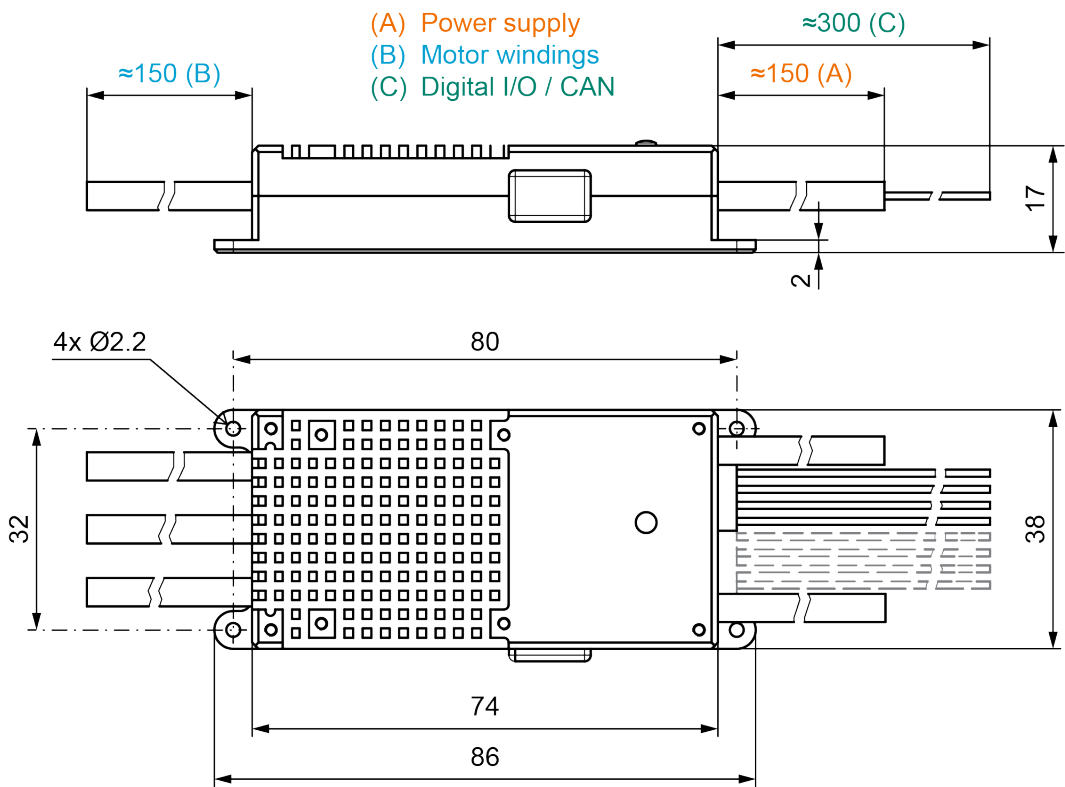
UAV-ESC 52/30 | Dimensional drawing [mm]
